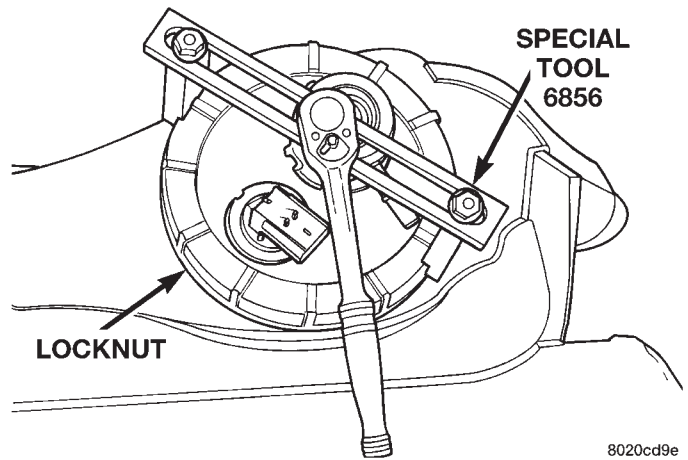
Fuel Reservoir Module Lock Nut Removal
